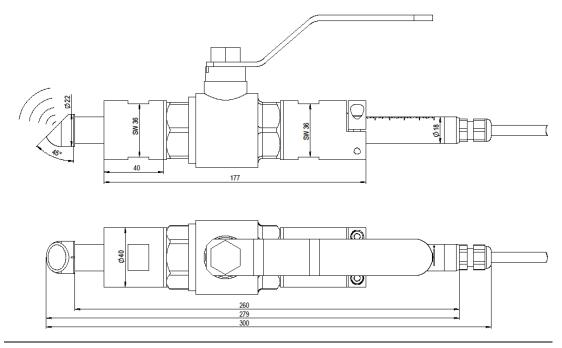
Dimensioned drawing pipe sensor Type TSP0V200
